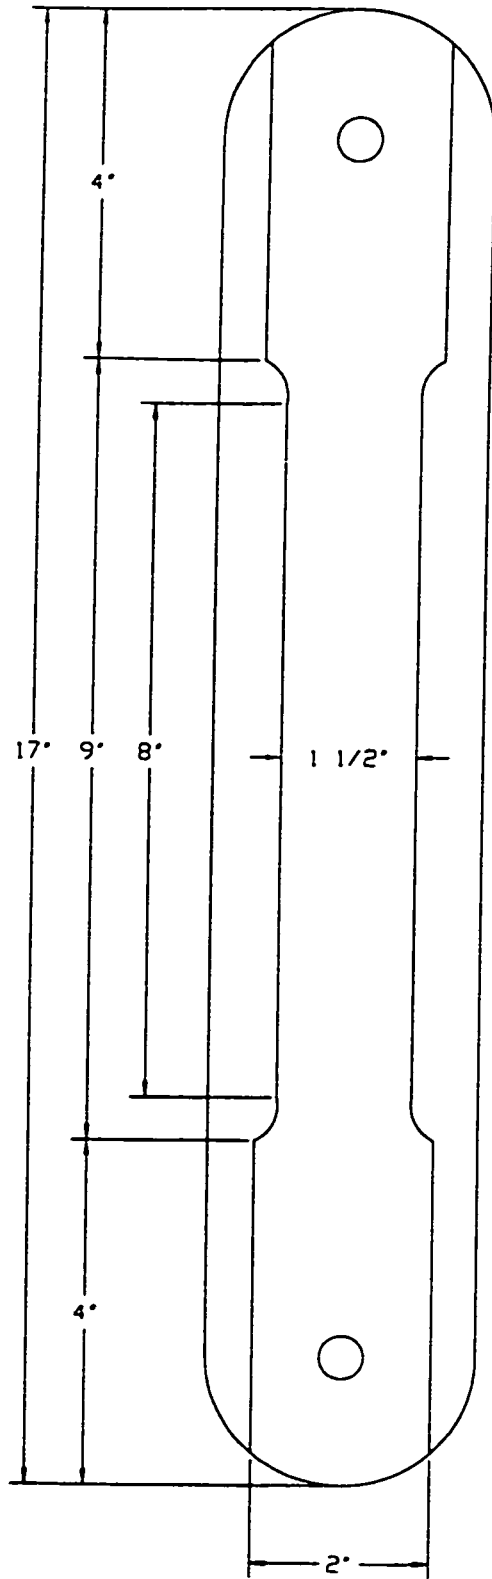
Dimensions of ASTM Long Tension Test Specimen
